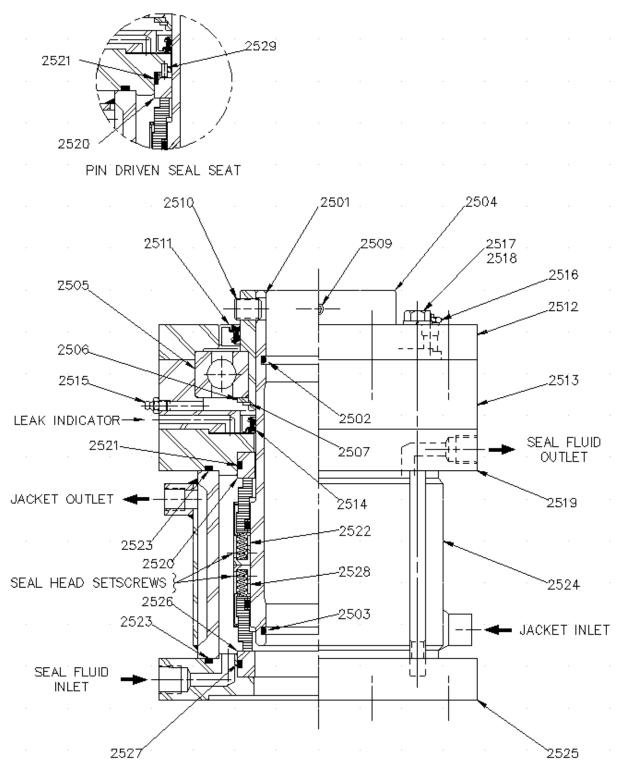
Mechanical Seal Cartridge (Balanced seals)
